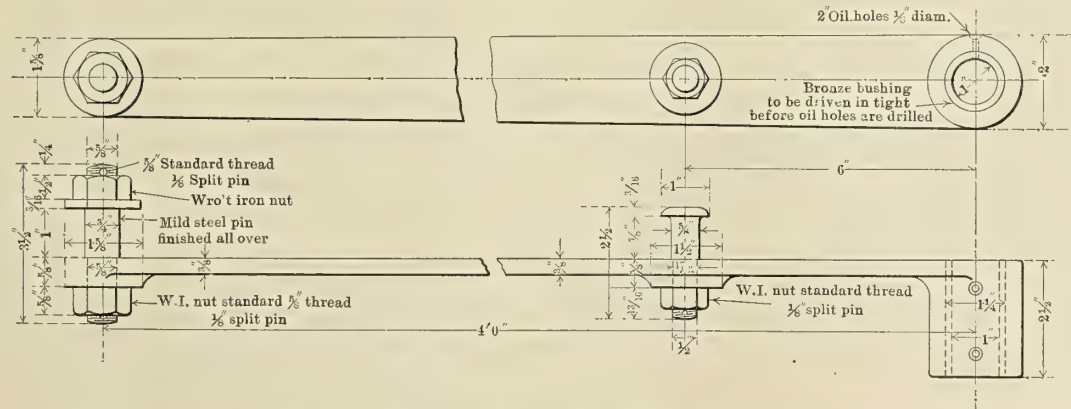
LEVER FOR L. P. ENGINE. MAKE ONE OF WROUGHT IRON.
